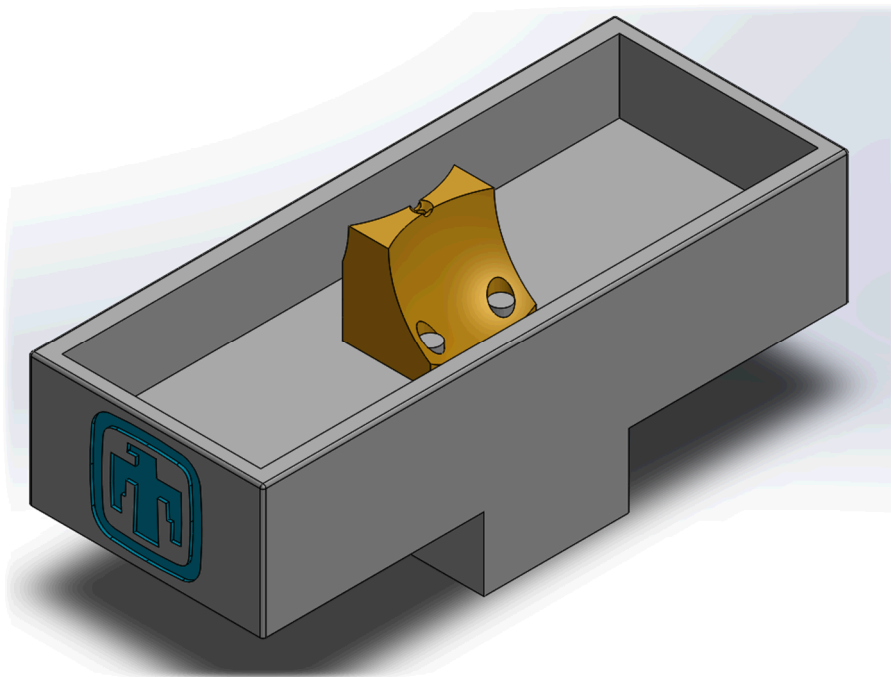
Thread Wire Fixture. Fixture is capable of positioning thread wires ranging from 0.1 mm to 6mm in size for horizontal measurement with the standard diameter (0.375") parallel anvils. The master cylinder and glass microscope slides are not shown.
